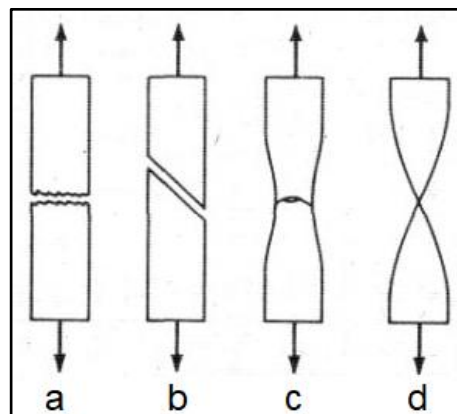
Fracture types on tensile tests: a) brittle fracture; b) shear fracture; c) ductile fracture ; d) perfect ductile fracture [3].
